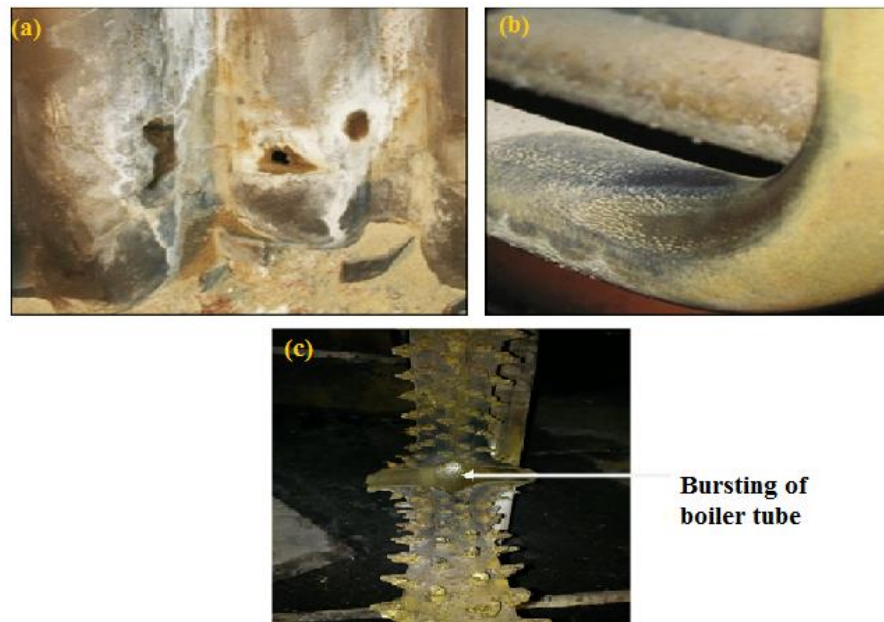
Failures of boiler tube due to erosion in fluidized boilers: (a) Damage due to erosion of wall, (b) Damage super-heater tube, and (c) Bursting of boiler tube.
